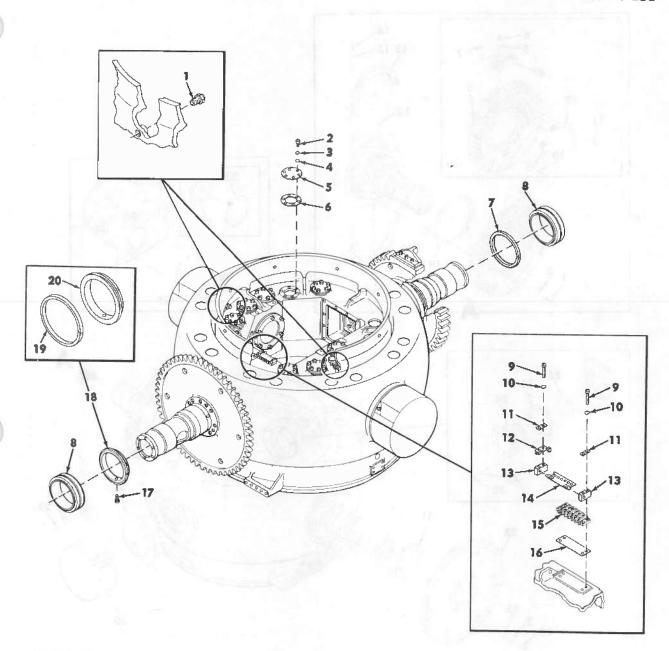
HOUSING /8171020/-PARTIAL EXPLODED VIEW
